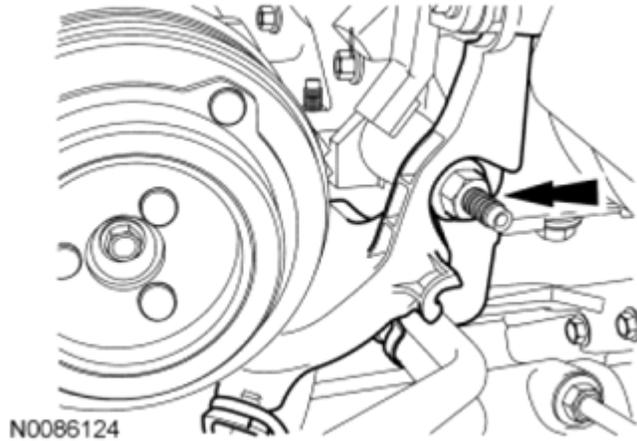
Locating Transmission Cooler Tube Support Bracket And Nut
